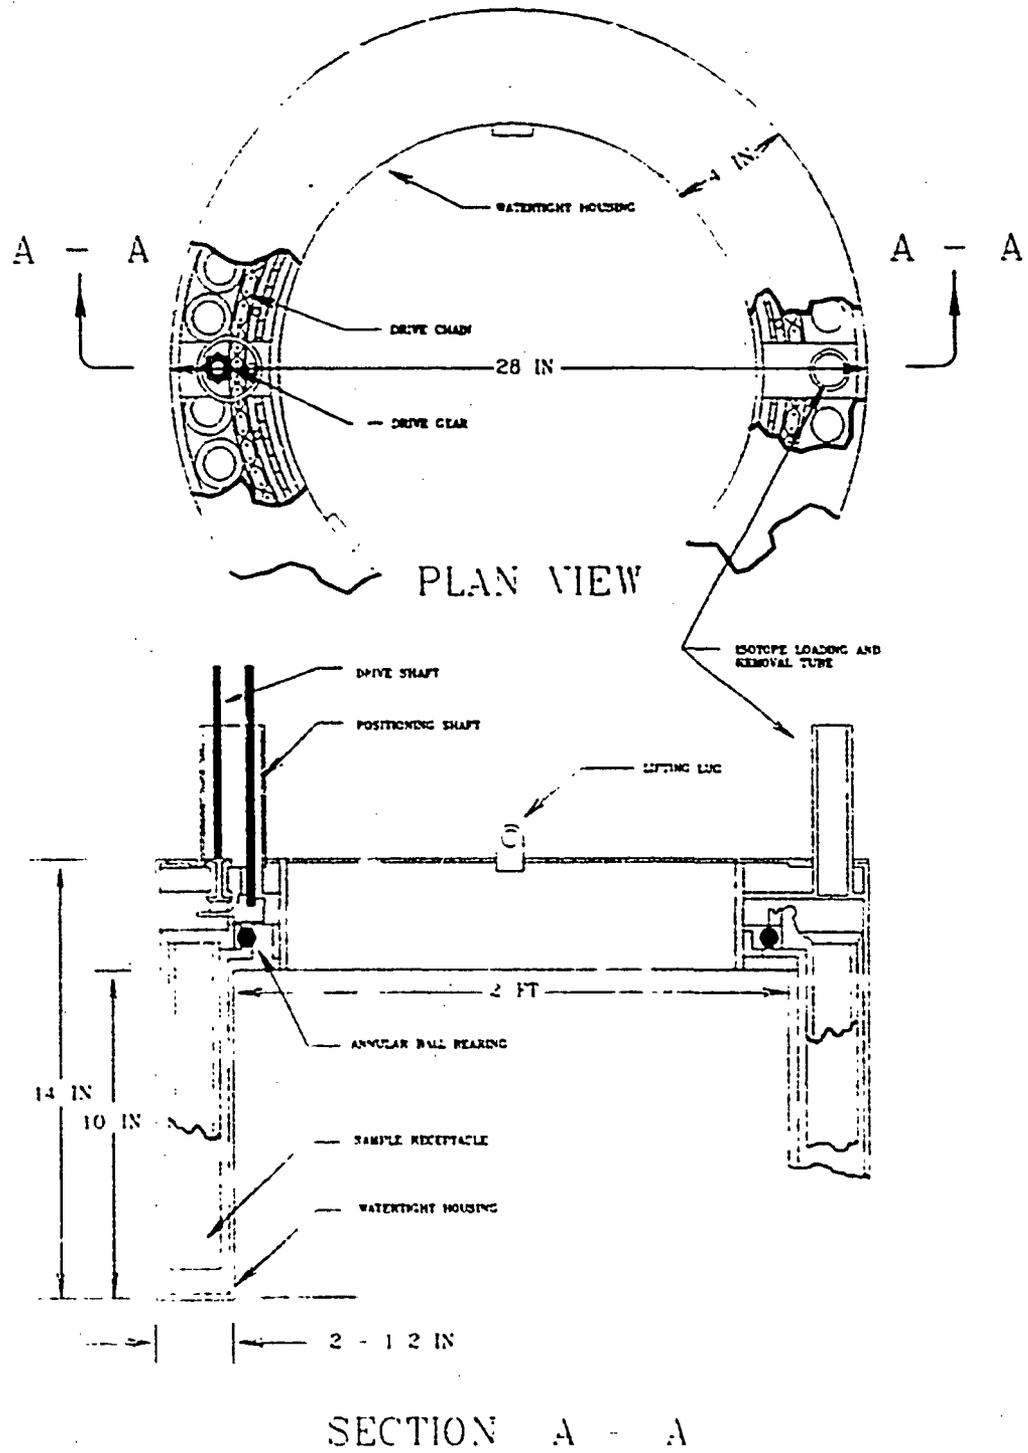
Rotary Specimen Rack Assembly (schematic)
